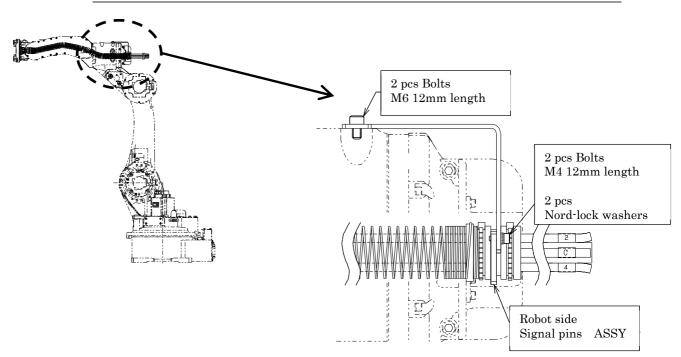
Fixing robot side signal pin ASSY - attachment to robot's U-axis
